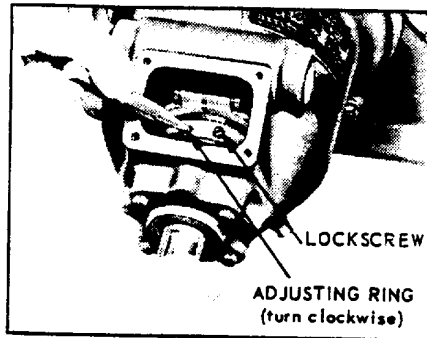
, CLUTCH ADJUSTMENT, ACN, BKN
